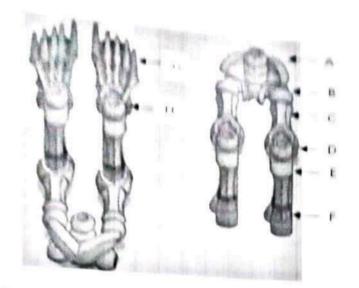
Complete Lower body part exoskeleton (3d Model designed)
